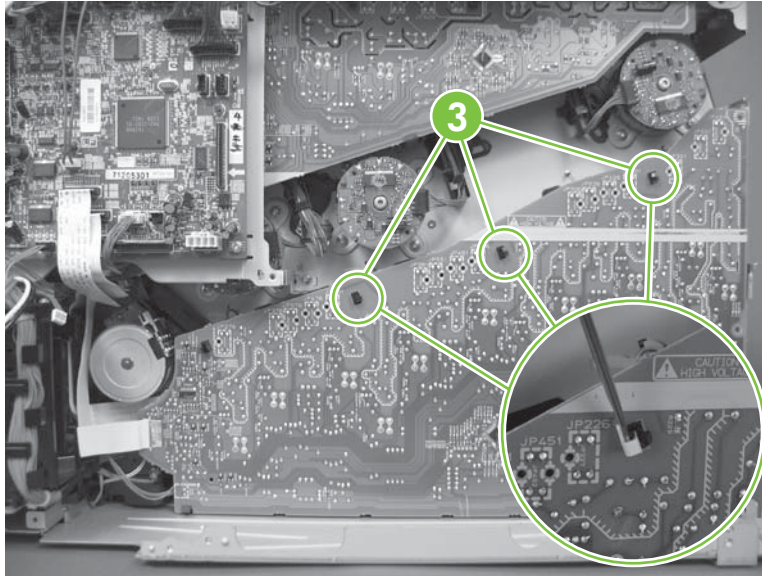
Remove the high-voltage power supply lower (1 of 4)
